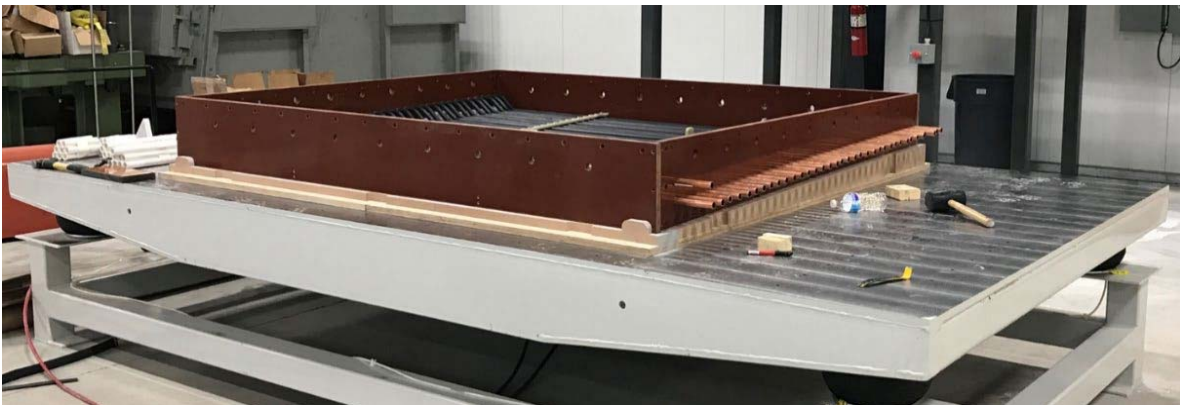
Picture of a machined casting mandrel with phenolic side board and coil segments in place all located on the vibration table used to aid in the casting process
